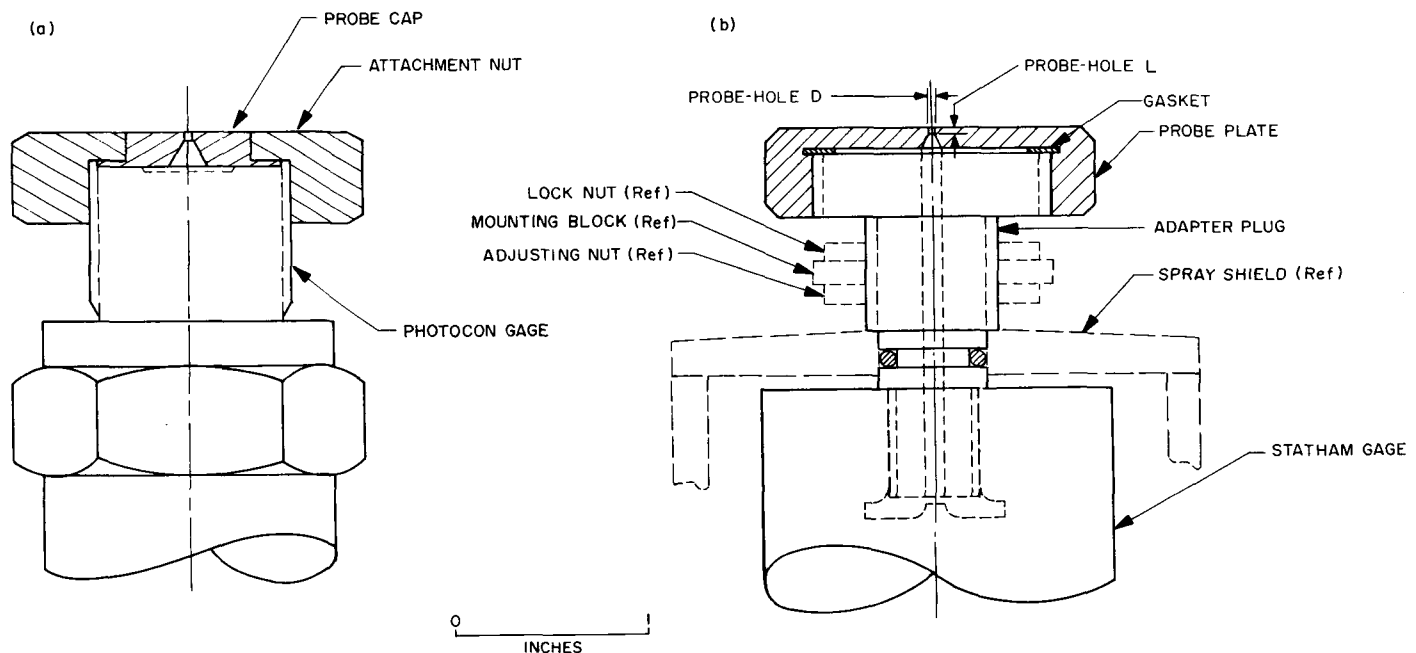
Details of flat-plate dynamic-head probe gage assemblies:
